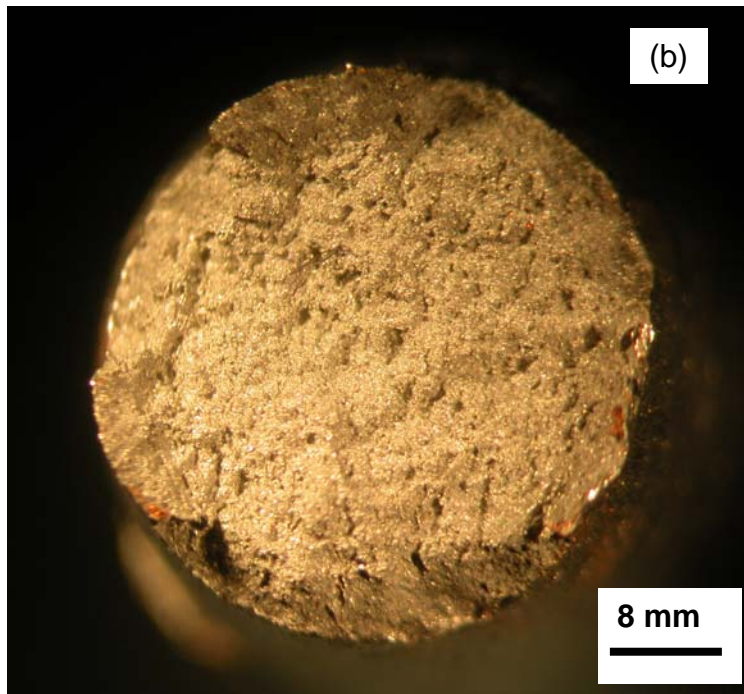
Optical images of the fracture surface of the round-bar tensile specimen in the as-received condition. A tensile test shows a ductile behavior (a) side view and (b) cross sectional view.
